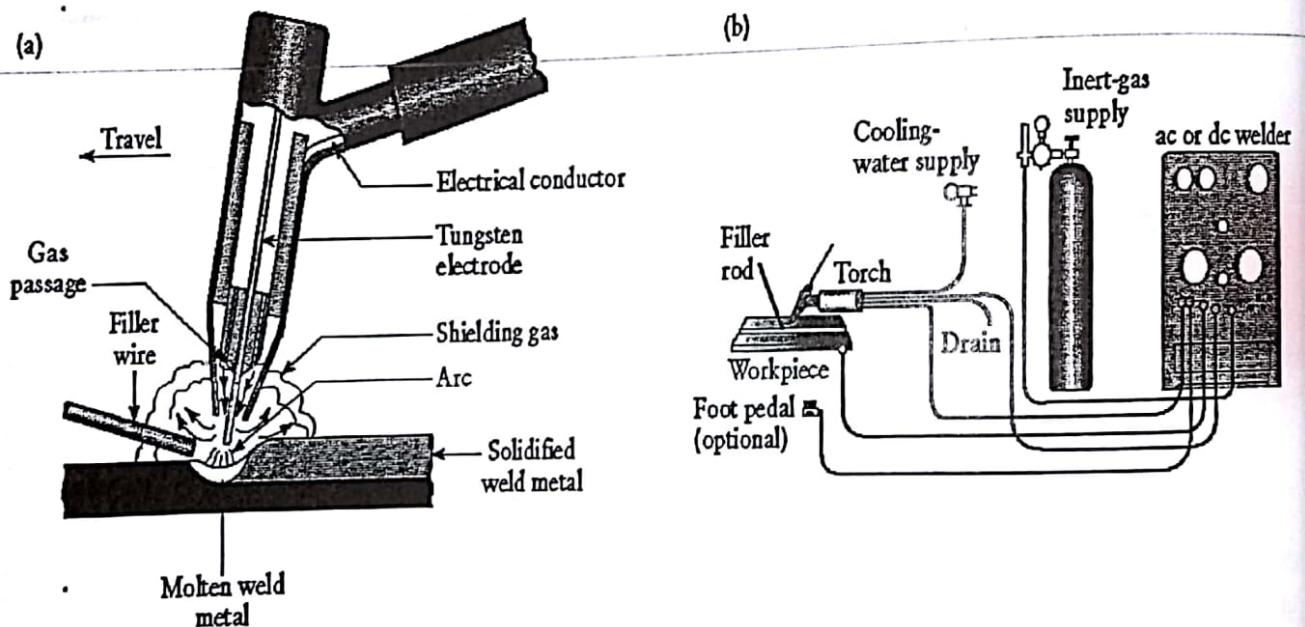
Tungsten inert-gas (TIG) welding
